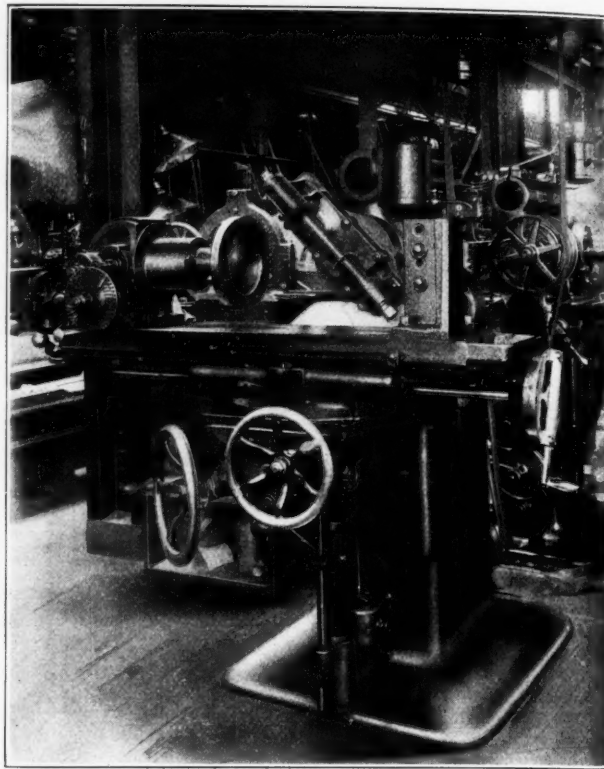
Spiral Cutting Attachment for Milling Machine.
